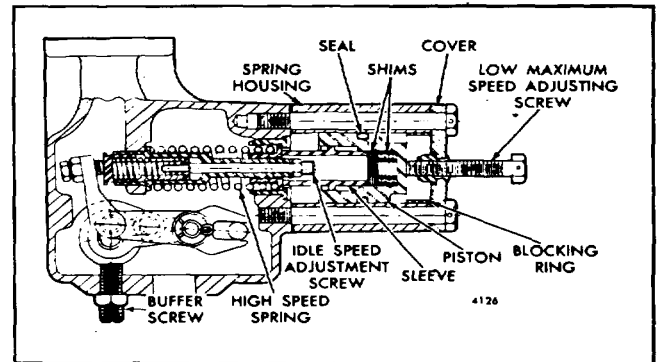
Spring and Piston Assembly of Current Dual Range Governor
